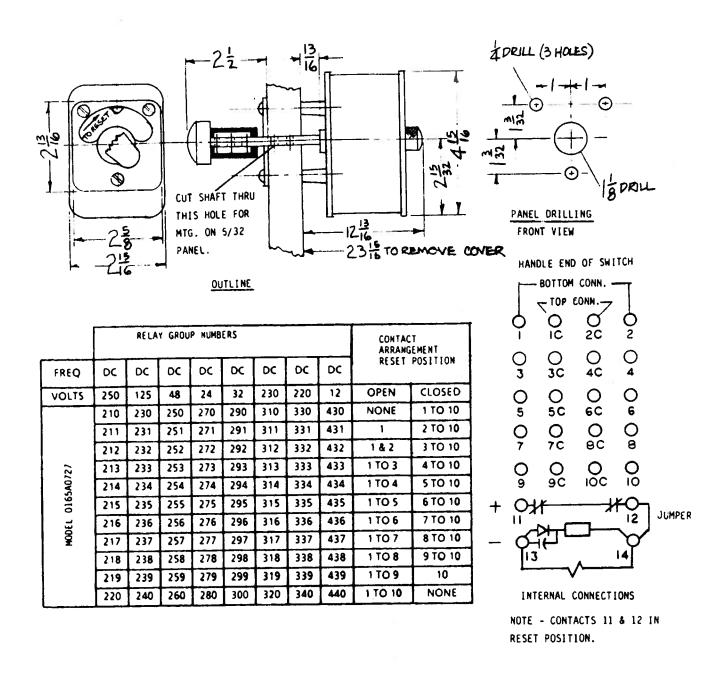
(0178A7112-4) Outline, Panel Drilling and Internal Connections for HEA62B Relay
